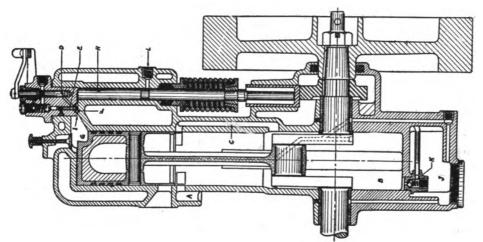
Sectional view of new Stenger combined poppet and sleeve valve engine.
